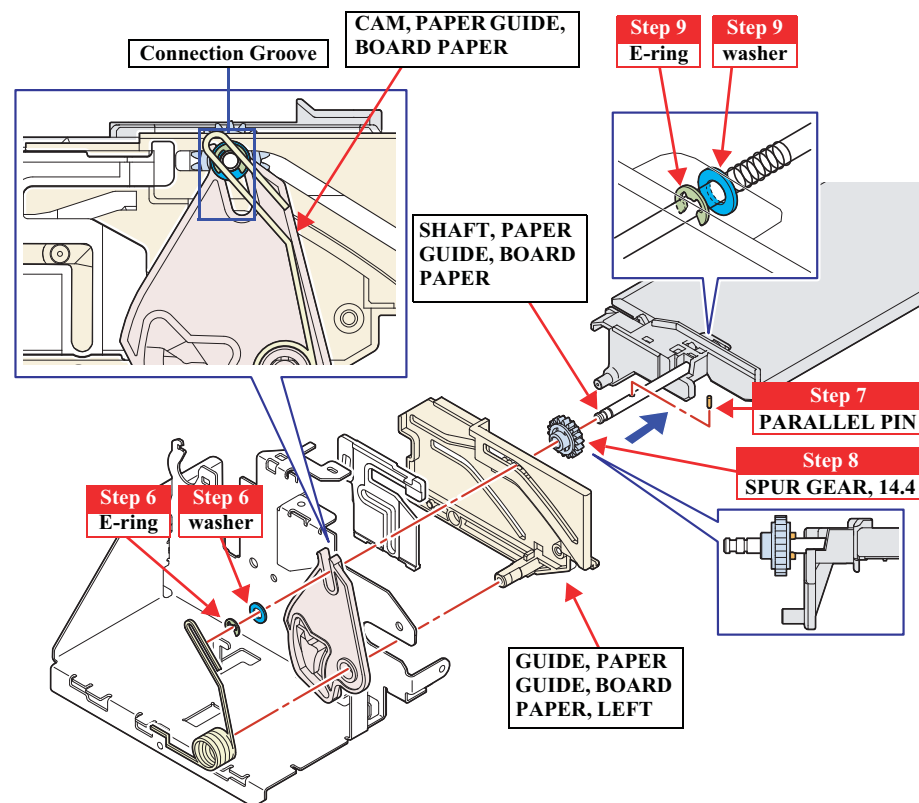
Removing the SHAFT, PAPER GUIDE, BOARD PAPER
